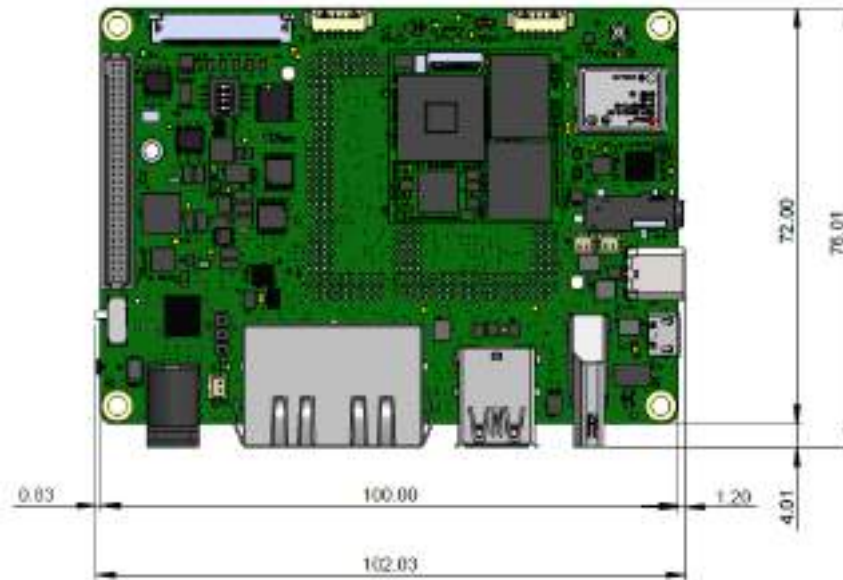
Mechanical Dimensions of i.MX 8X Lite Pico ITX SBC Top View
